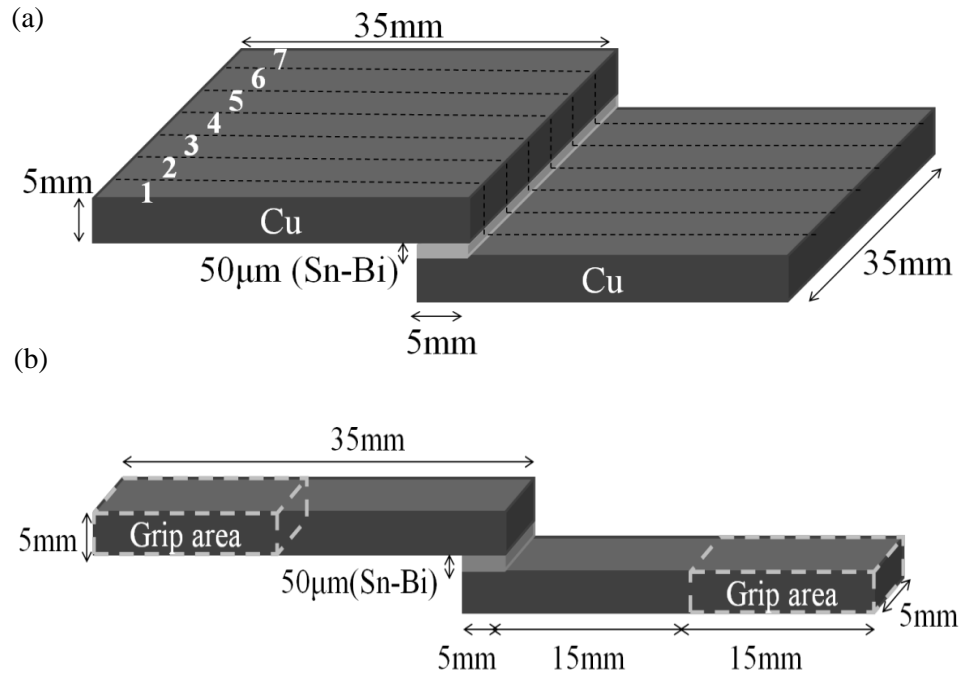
Schematic diagram of (a) as-reflowed solder joint and (b) solder joint of 5 mm width machined with EDM.
